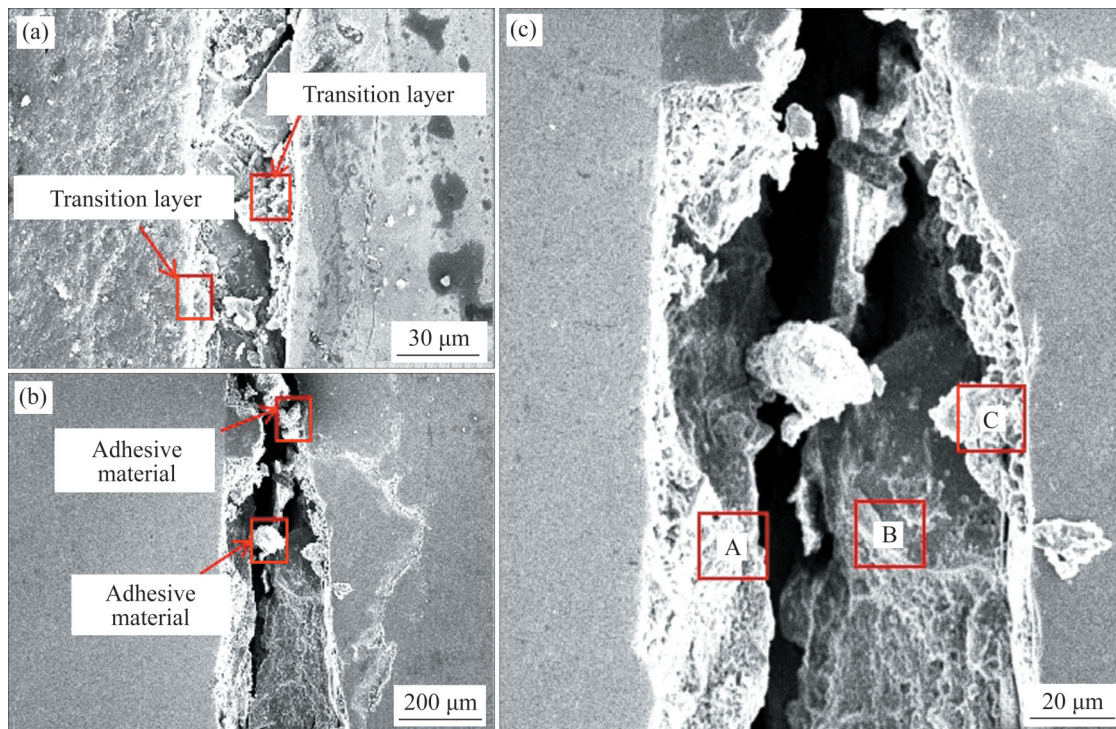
SEM images of weld fracture with different fracture degrees (side view): (a) Initial fracture of weld; (b) Weld fracture; (c) Amplification electron microscopy of fracture morphology of joint
